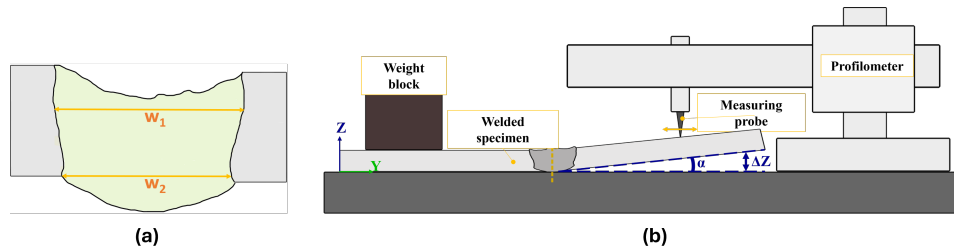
Experimental measurements for (a) weld geometry; (b) distortion angle.
